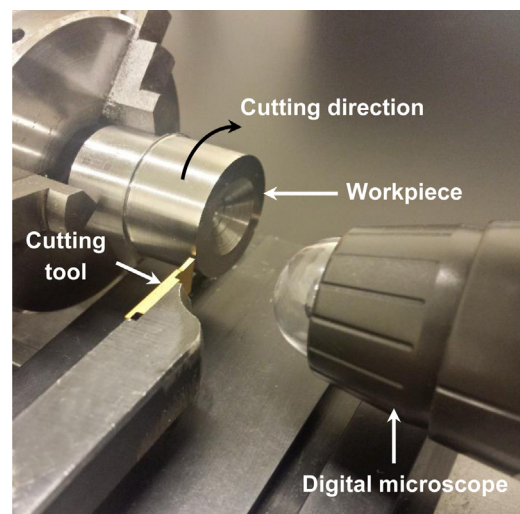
In situ experimental setup with the shear plane of the workpiece on a plane normal to the light beam of the microscope.
